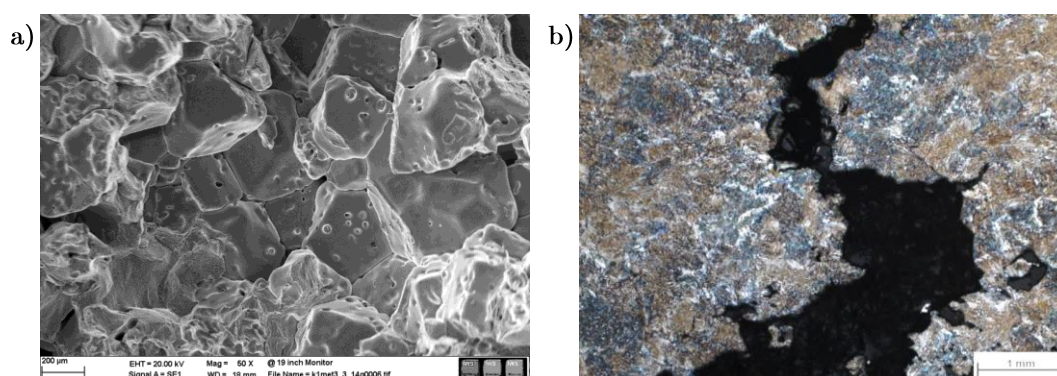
a) Fracture surface of specimen tested at 750°C (RA=31%). b) LOM-image taken from the specimen center at the onset of necking at 800°C (total exposure time=120s).
